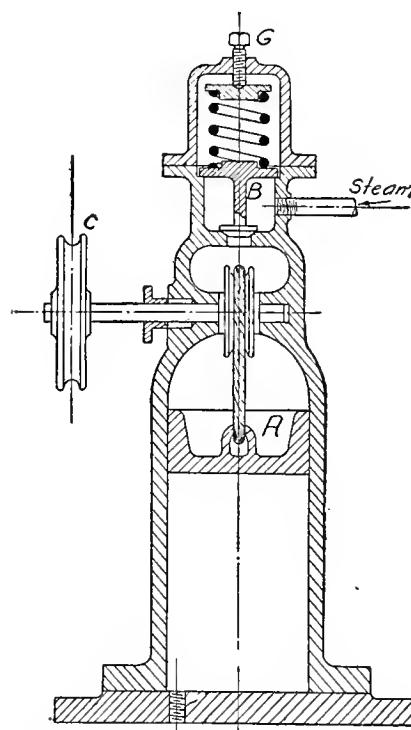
SECTIONAL VIEW OF DAMPER REGULATOR.
